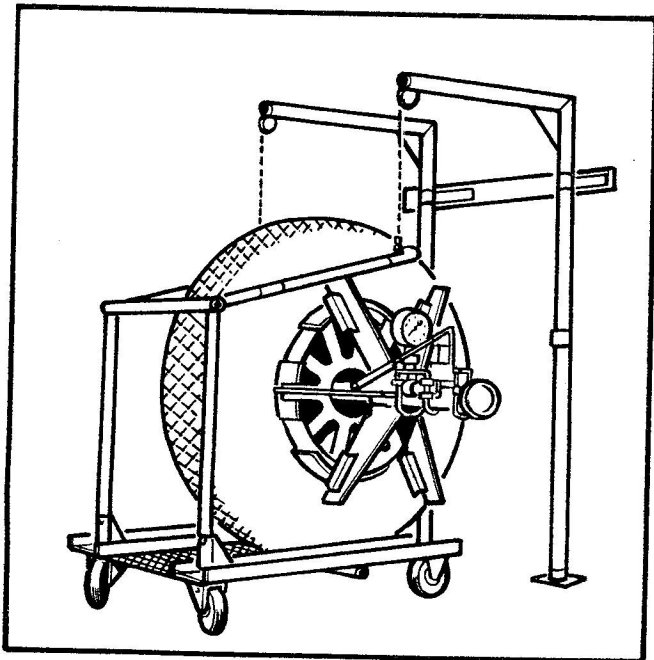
Breaking Bead from Wheel Using Bead Breaker
